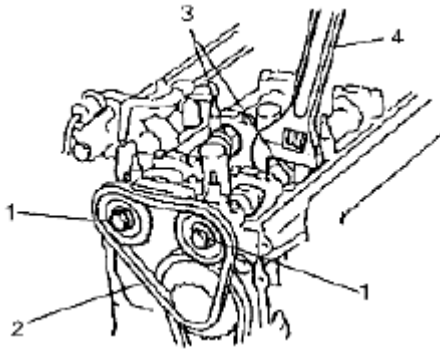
Identifying Camshaft Timing Sprockets & 2nd Timing Chain
